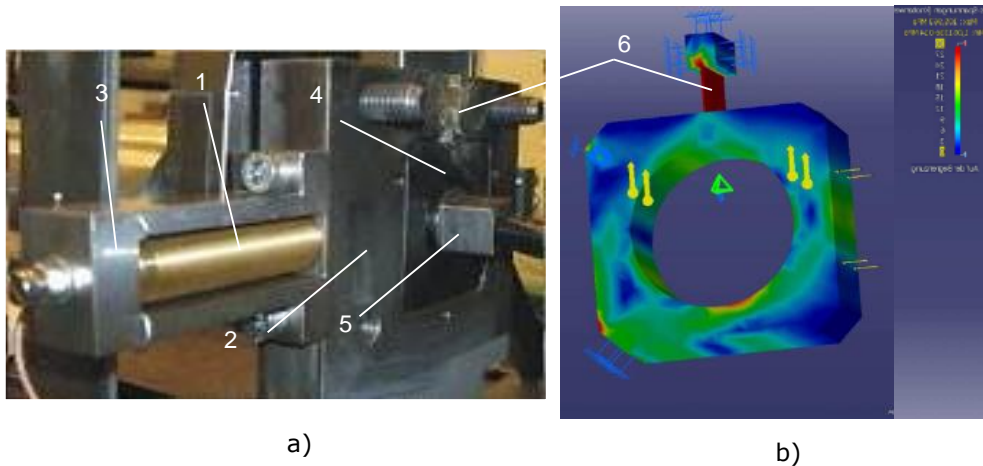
a) Active bearing; b) Stress analysis of the movable part of the bearing
